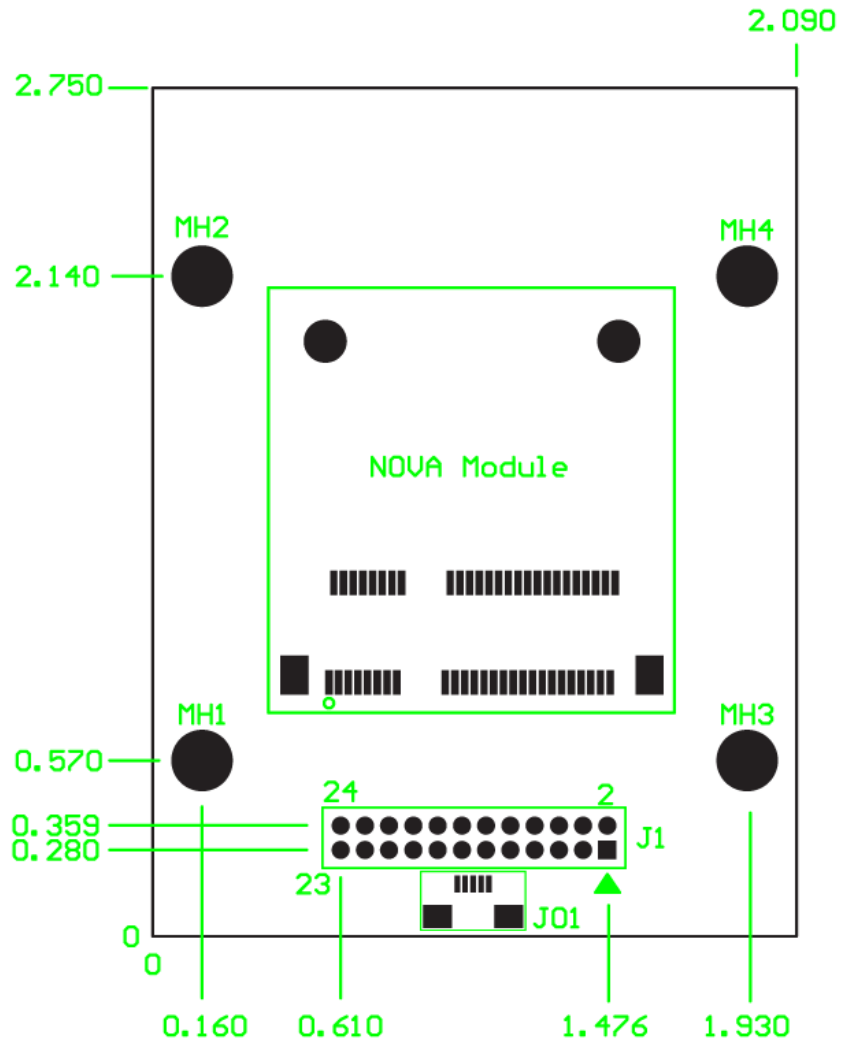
SP-IB-NV Mechanical Drawing (dimensions in inches)
